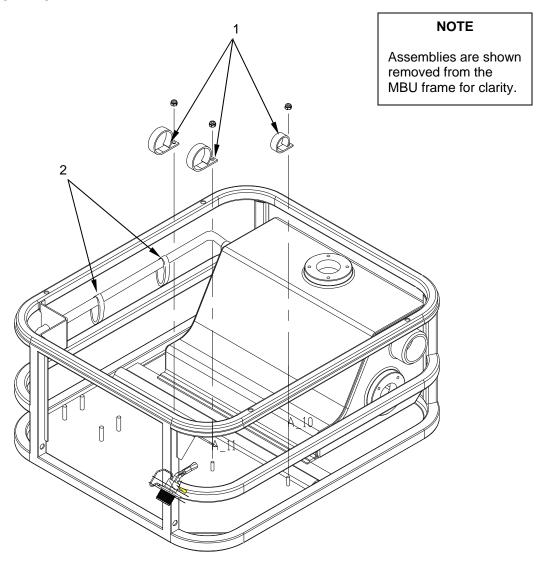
Inspect Chassis Mounted Cable Clips and Hose Clamps.
